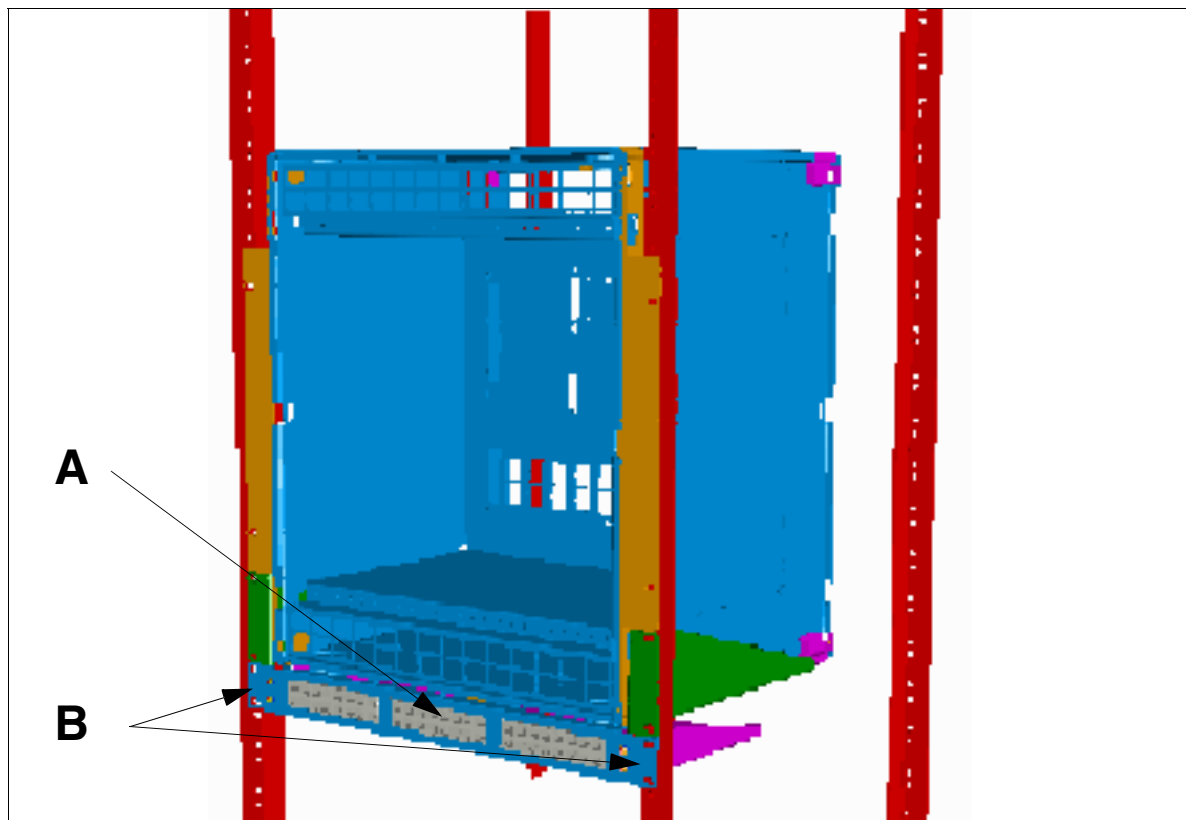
HiPath 3700 - Mounting the Patch Panel
